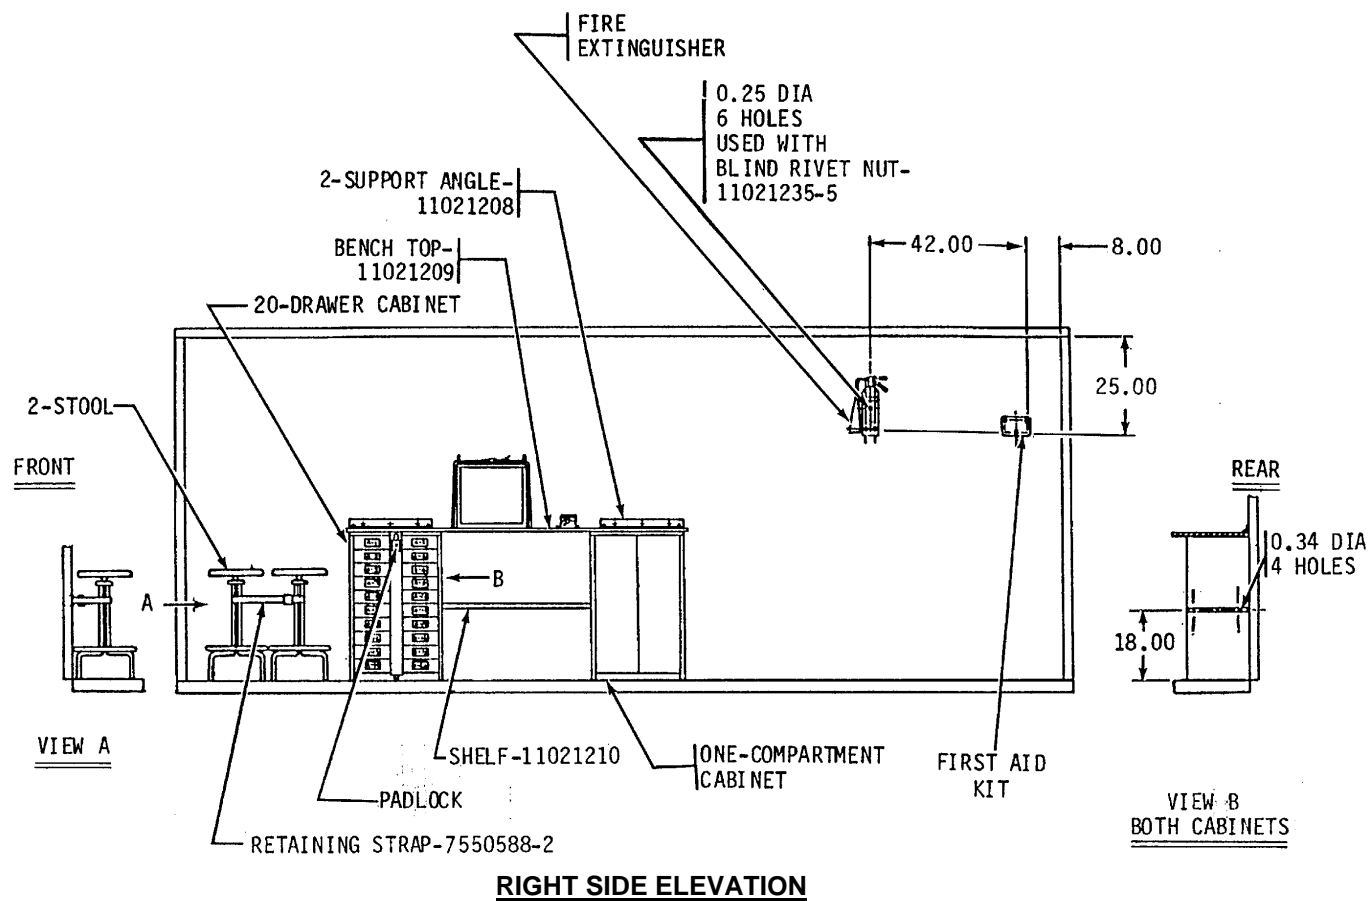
Components to be Mounted, Unit 2, ISO, Right Side Elevation.
